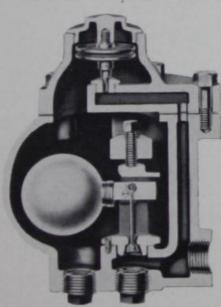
Webster Heavy Duty Drip Trap, Size 0026-T. The 026-T is similar excepting that float interior is bolted instead of clamped
